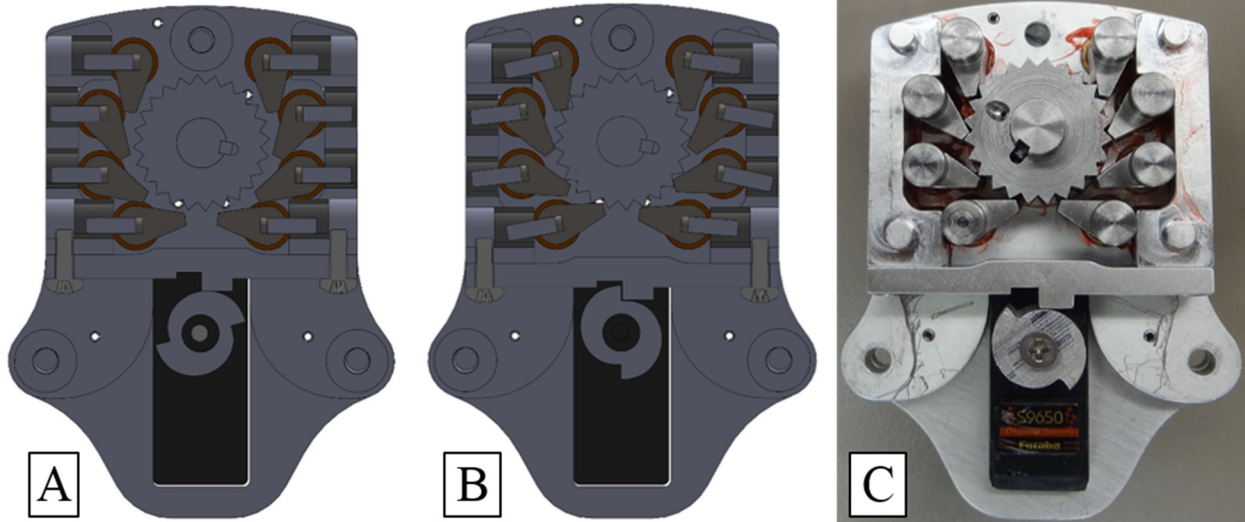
Section view of clutch mechanism (A) Cross section through pawl release arm assembly in the free position. Note how the interaction of the servo cam, pawl release arm, pawls, and ratchet gear allow the ratchet gear to spin freely. (B) Cross section through pawl release arm assembly in the locked state. Note how the pawl release arm position is lower than in (A), and how the pawls are engaged with the ratchet gear. (C) Manufactured clutch mechanism shown in the locked position.
